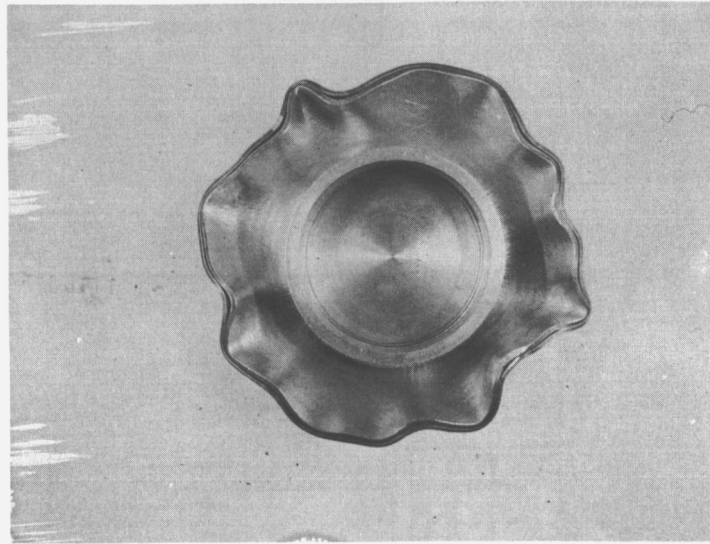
Top View of Magneform Assembly Shown in Figure 39.
